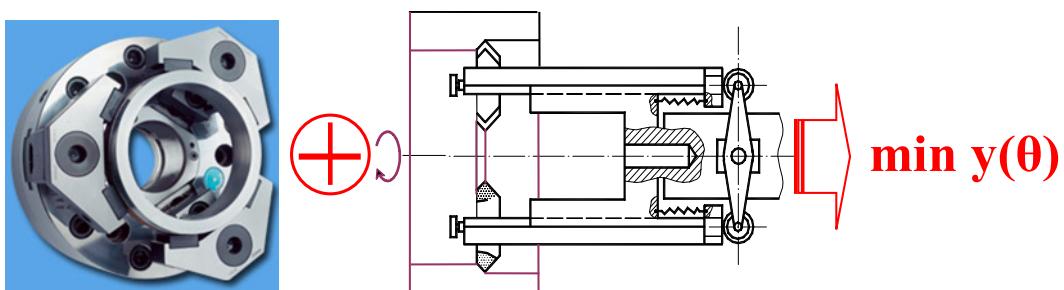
Complex manufacturing equipment for ring shaped work pieces machining
